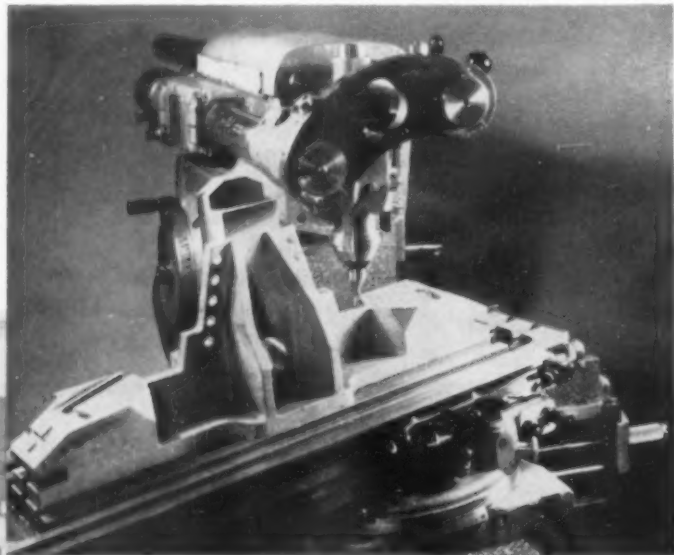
(above) Universal milling machine with vertical milling attachment.
